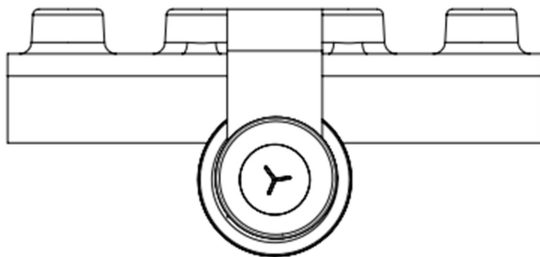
Side View of Assembled C-Clamp Arm and Finisher
